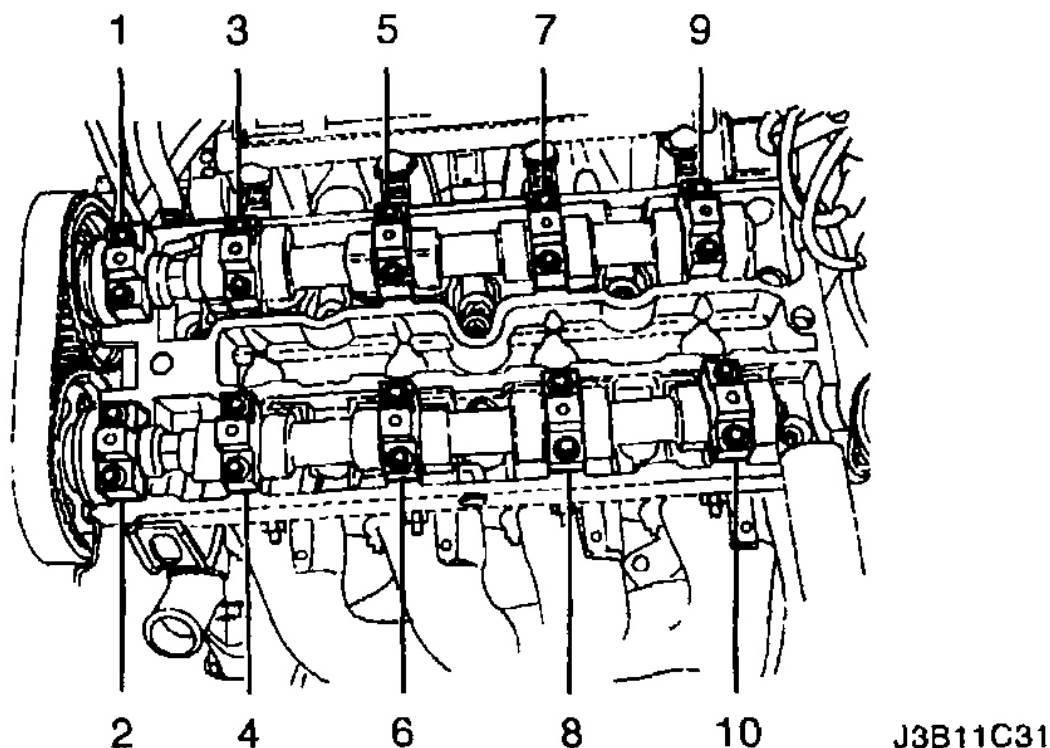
Tightening Camshaft Bearing Cap Bolts
